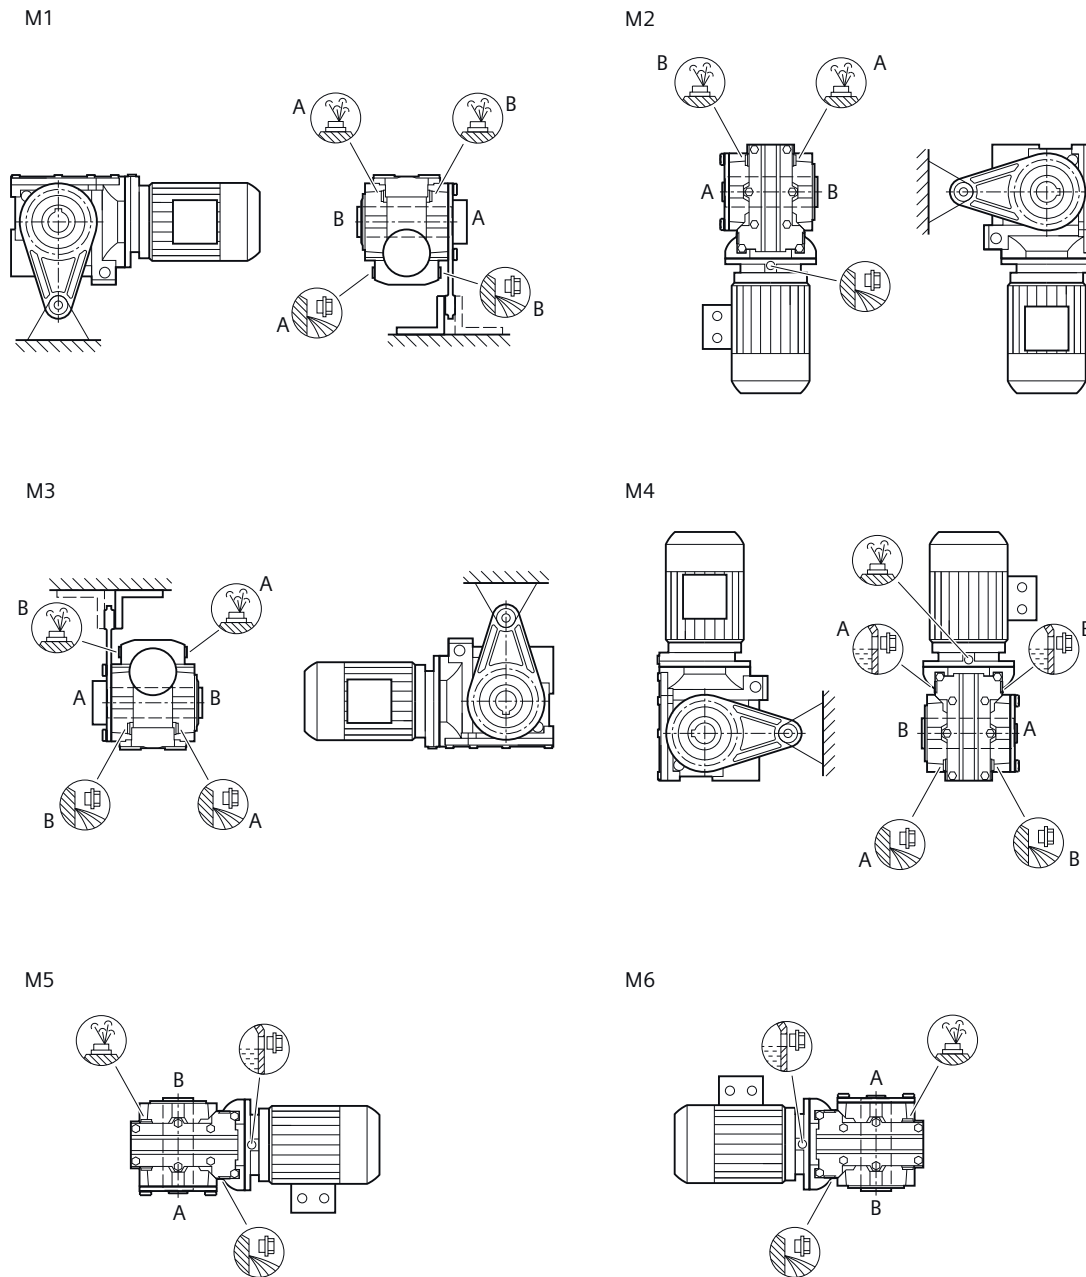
Mounting positions for helical worm gearbox CAD shaft-mounted design, size 29
